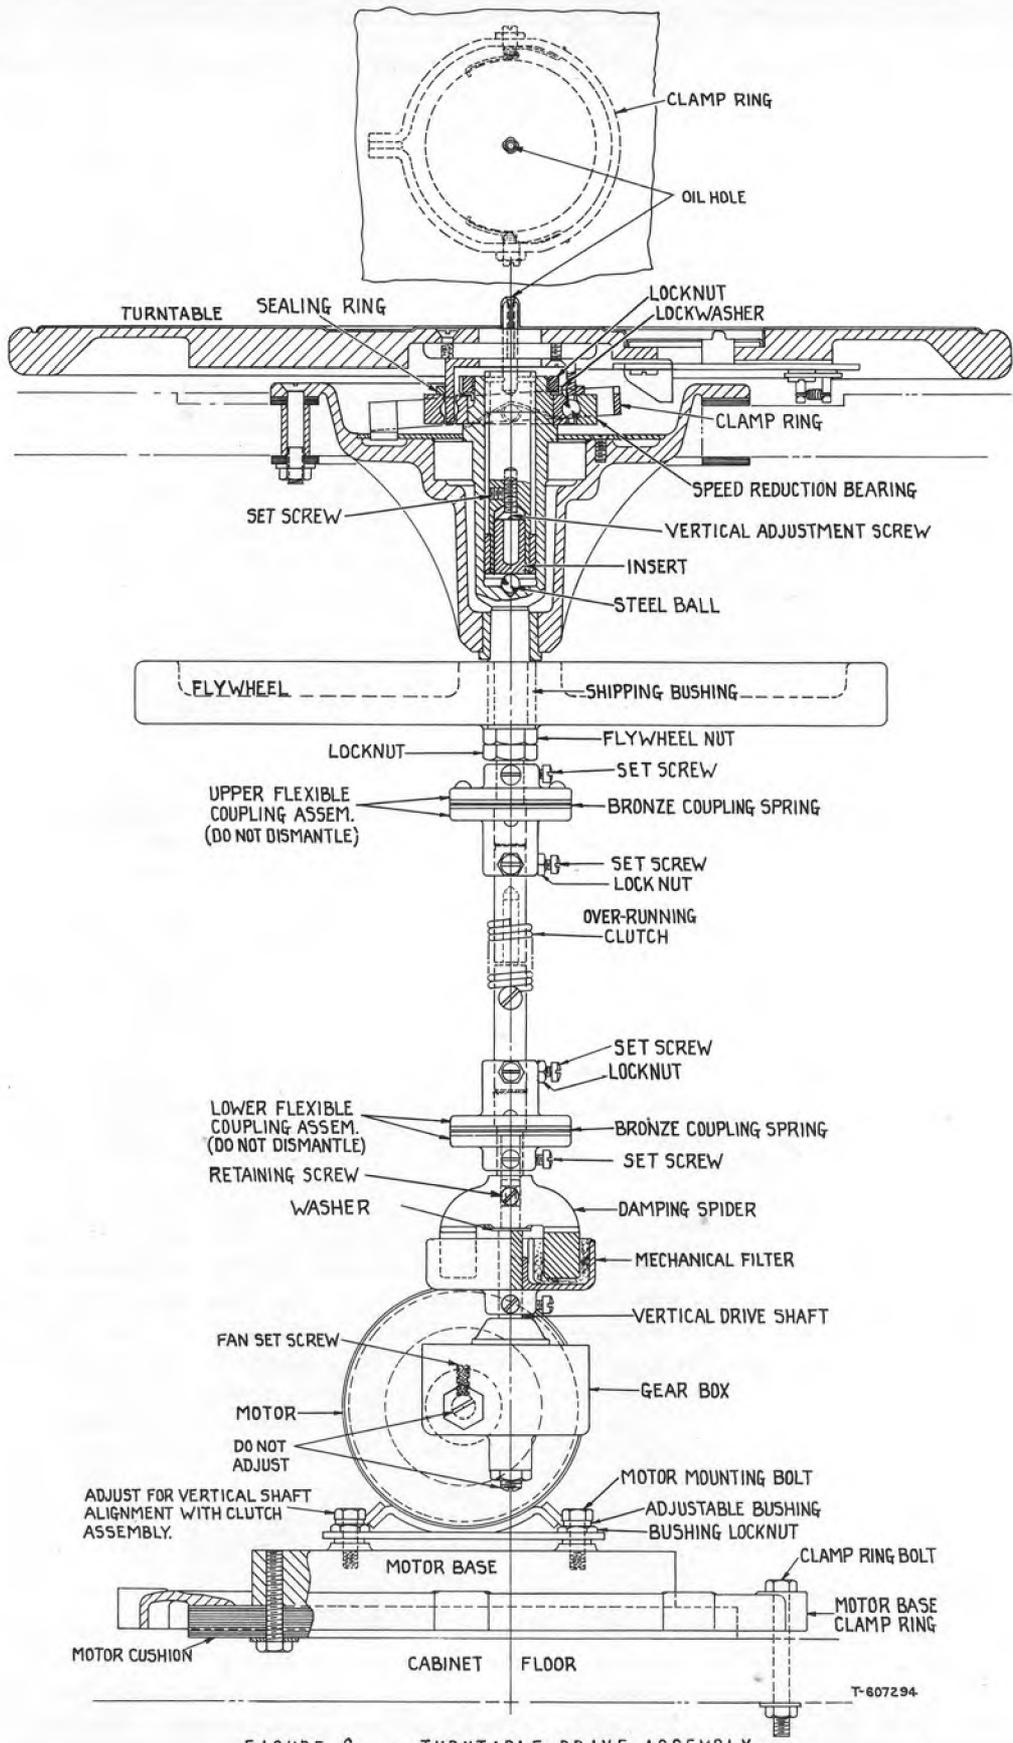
TURNTABLE DRIVE ASSEMBLY.
